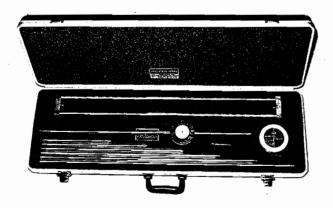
Benchmark Gauge Set for Turbomachinery Work.
